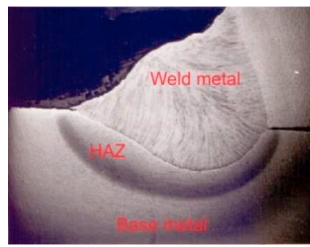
Macrostructure of executed welded joint [1]
